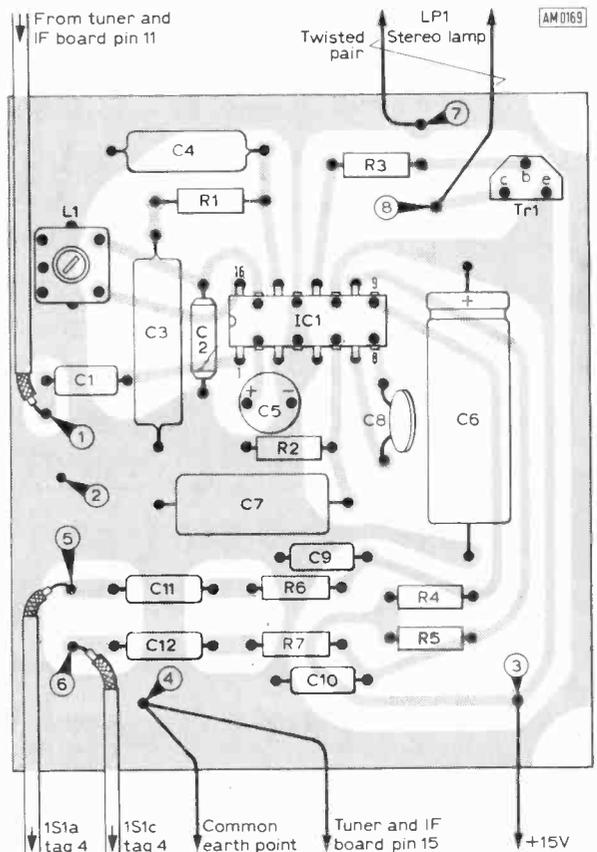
Component location and printed circuit layout for the Stereo Decoder board. Both drawings are actual size.
